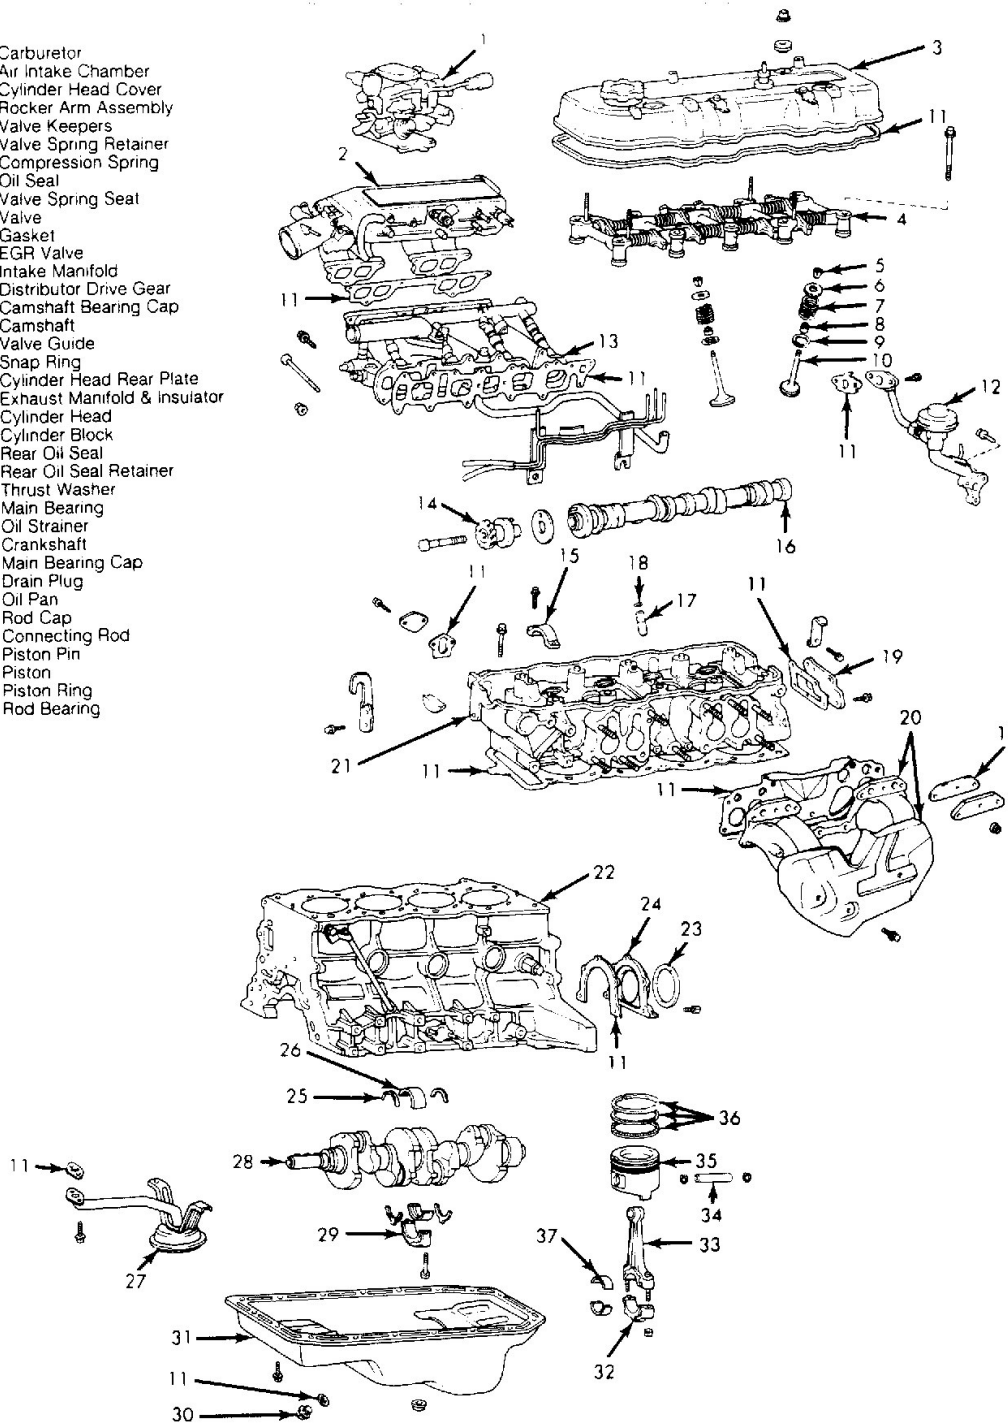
Exploded View of 22R-E Cylinder Head & Cylinder Block Components
